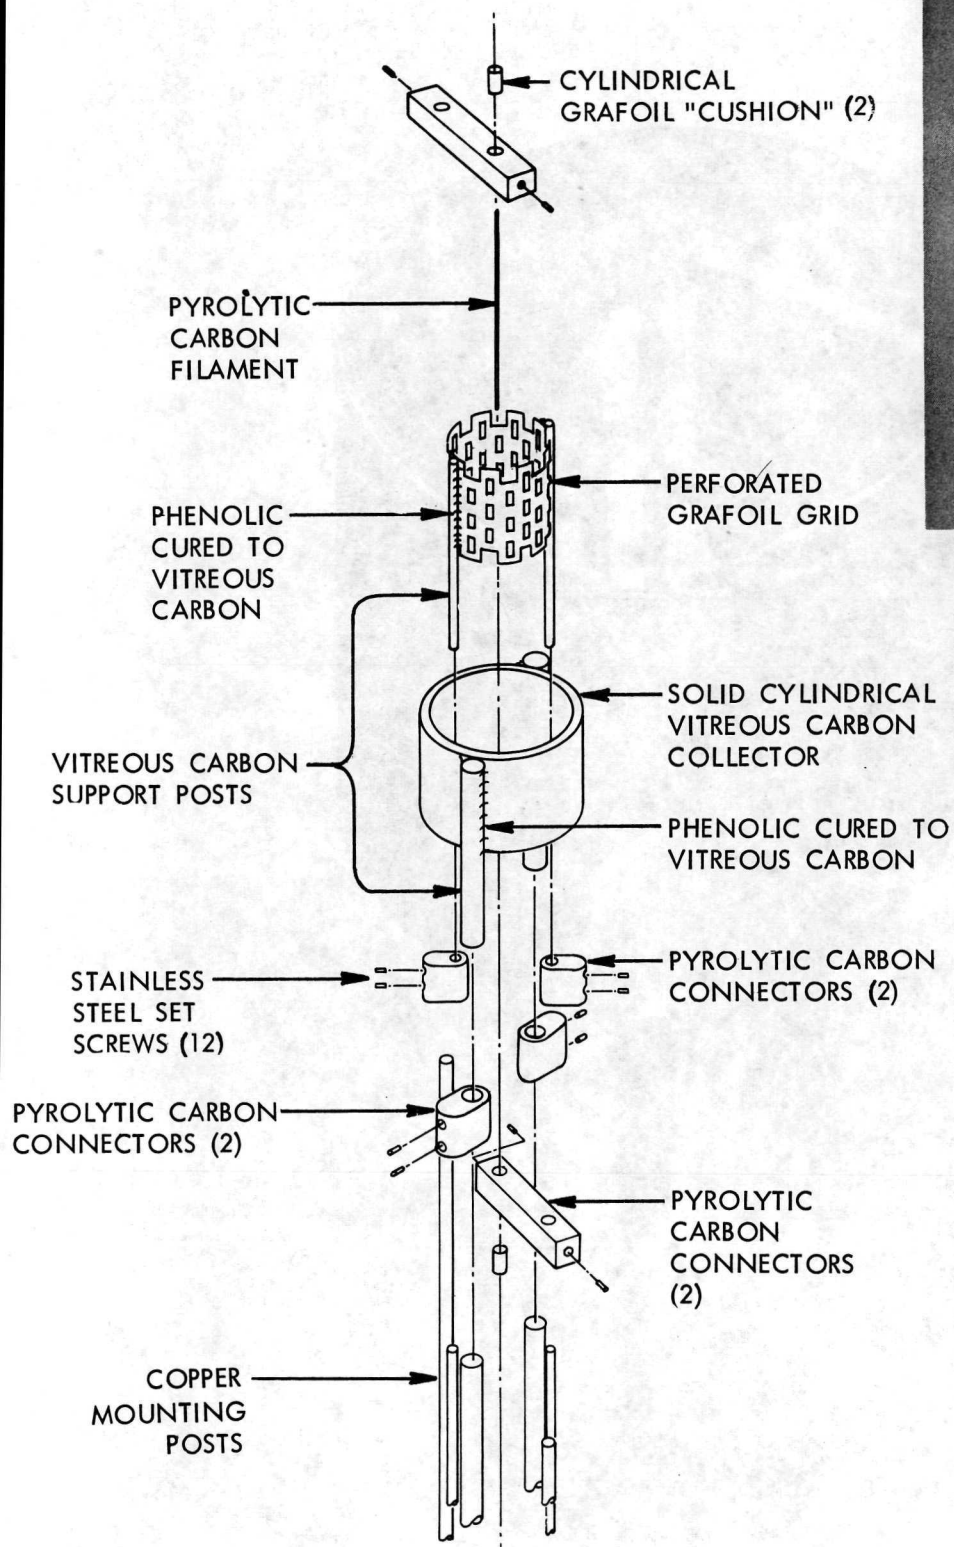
Prototype Carbon Vacuum Gauge No. 4
